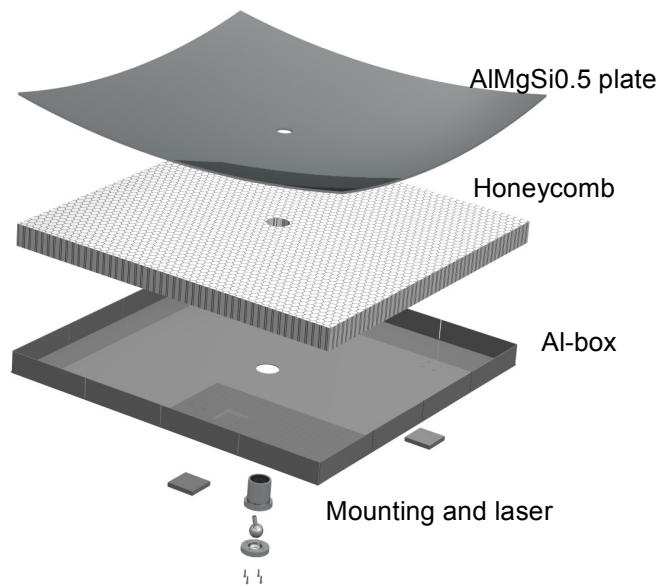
Exploded sketch of Aluminium diamond milled mirror [Doro, 2007].
